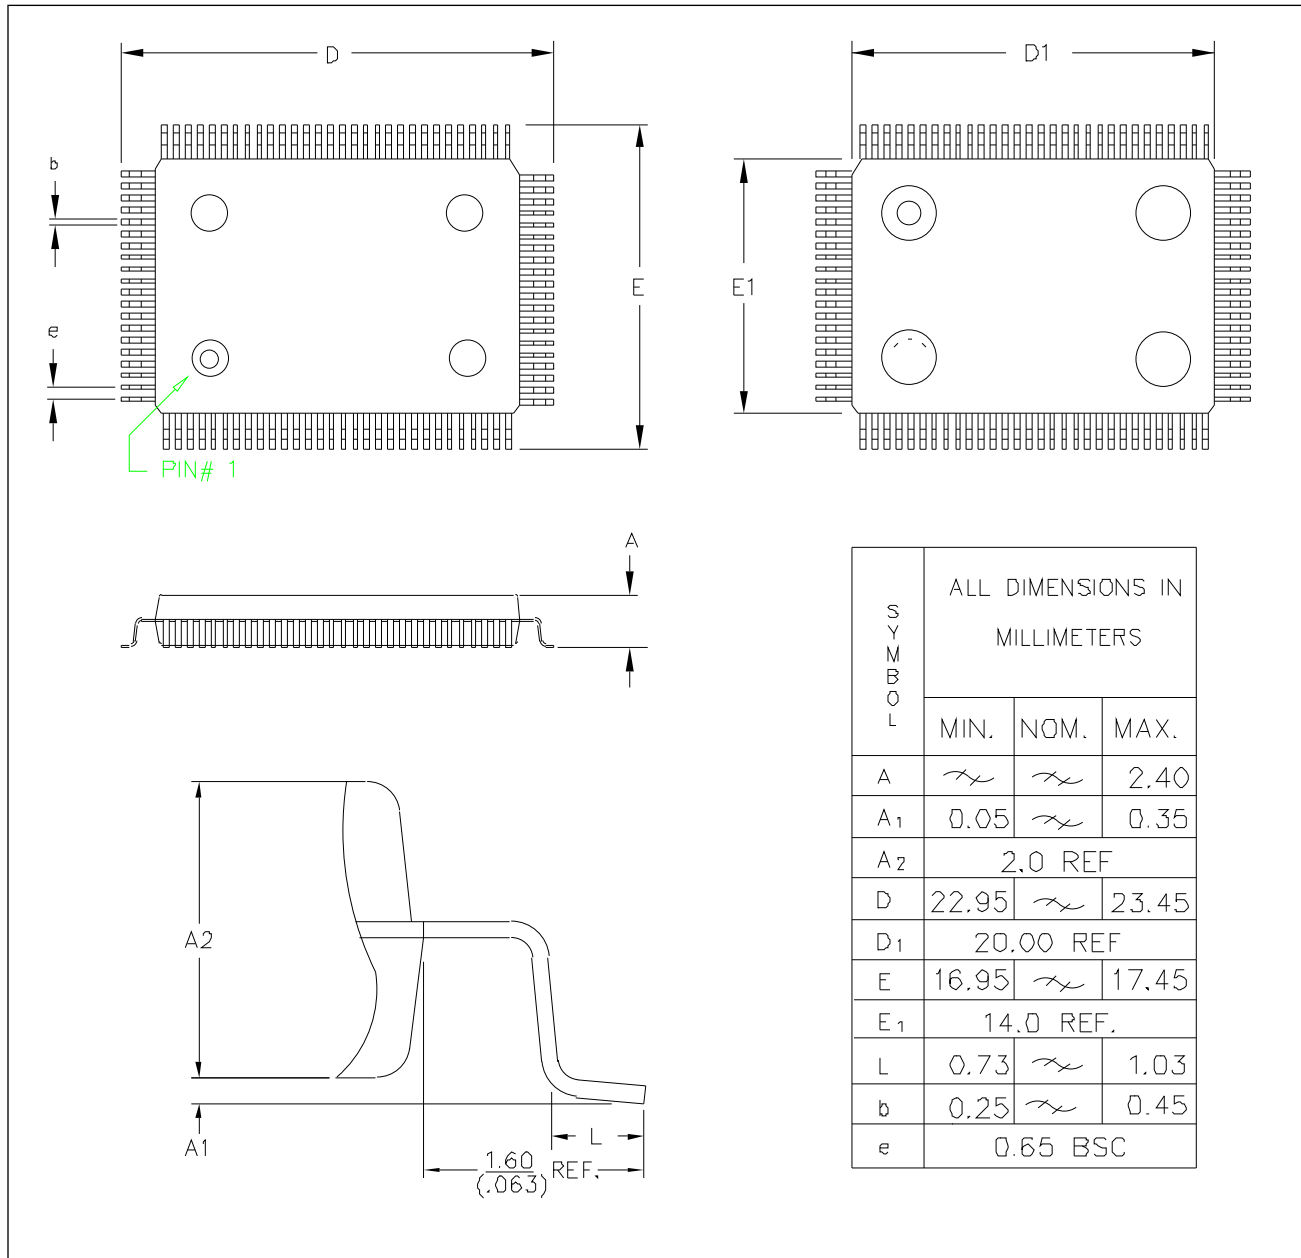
100-Pin PQFP Package Mechanical Drawing
